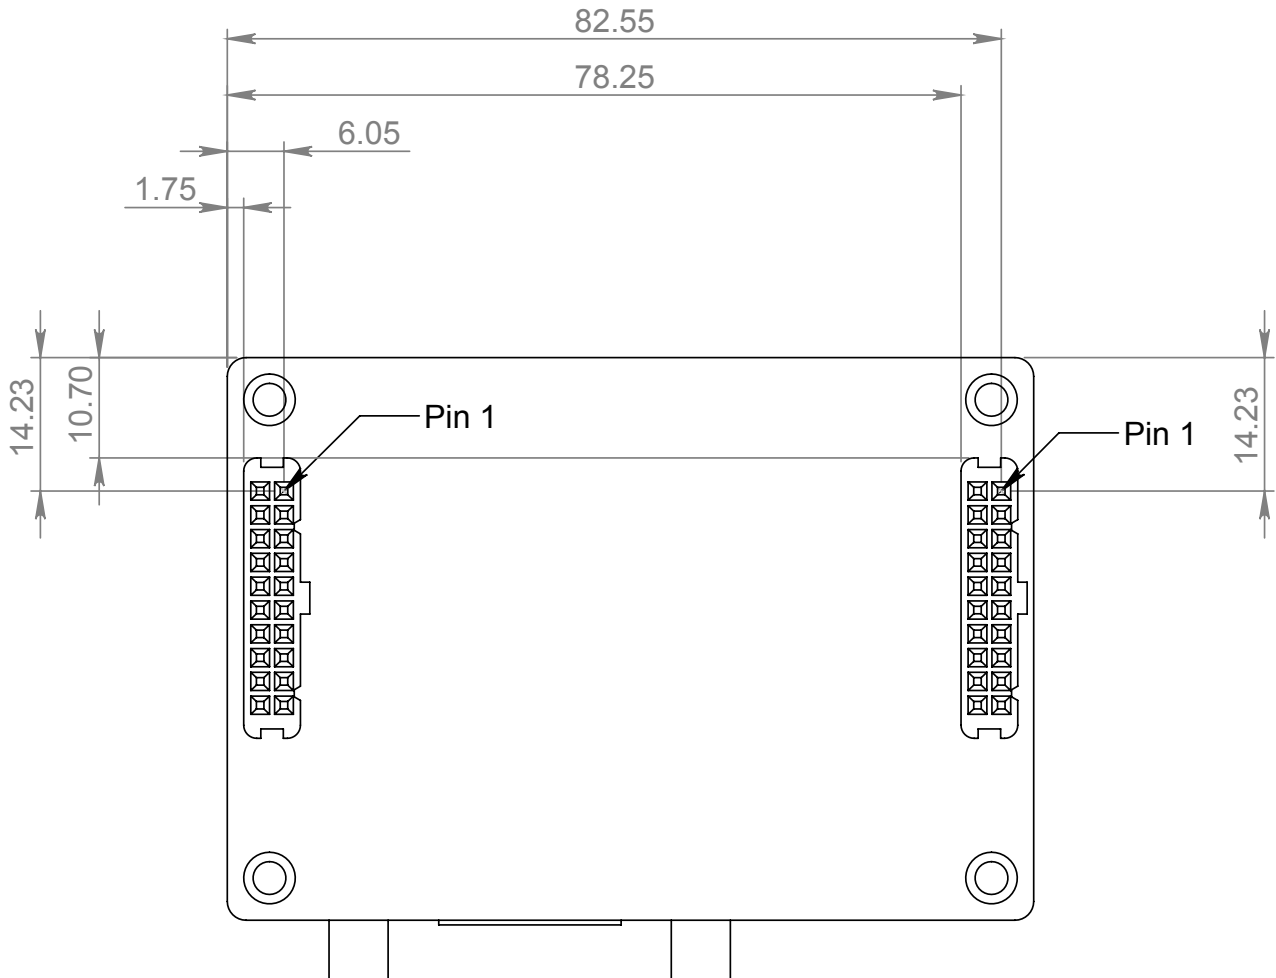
Bottom view of ZOOM - dimensions to interface headers centre
